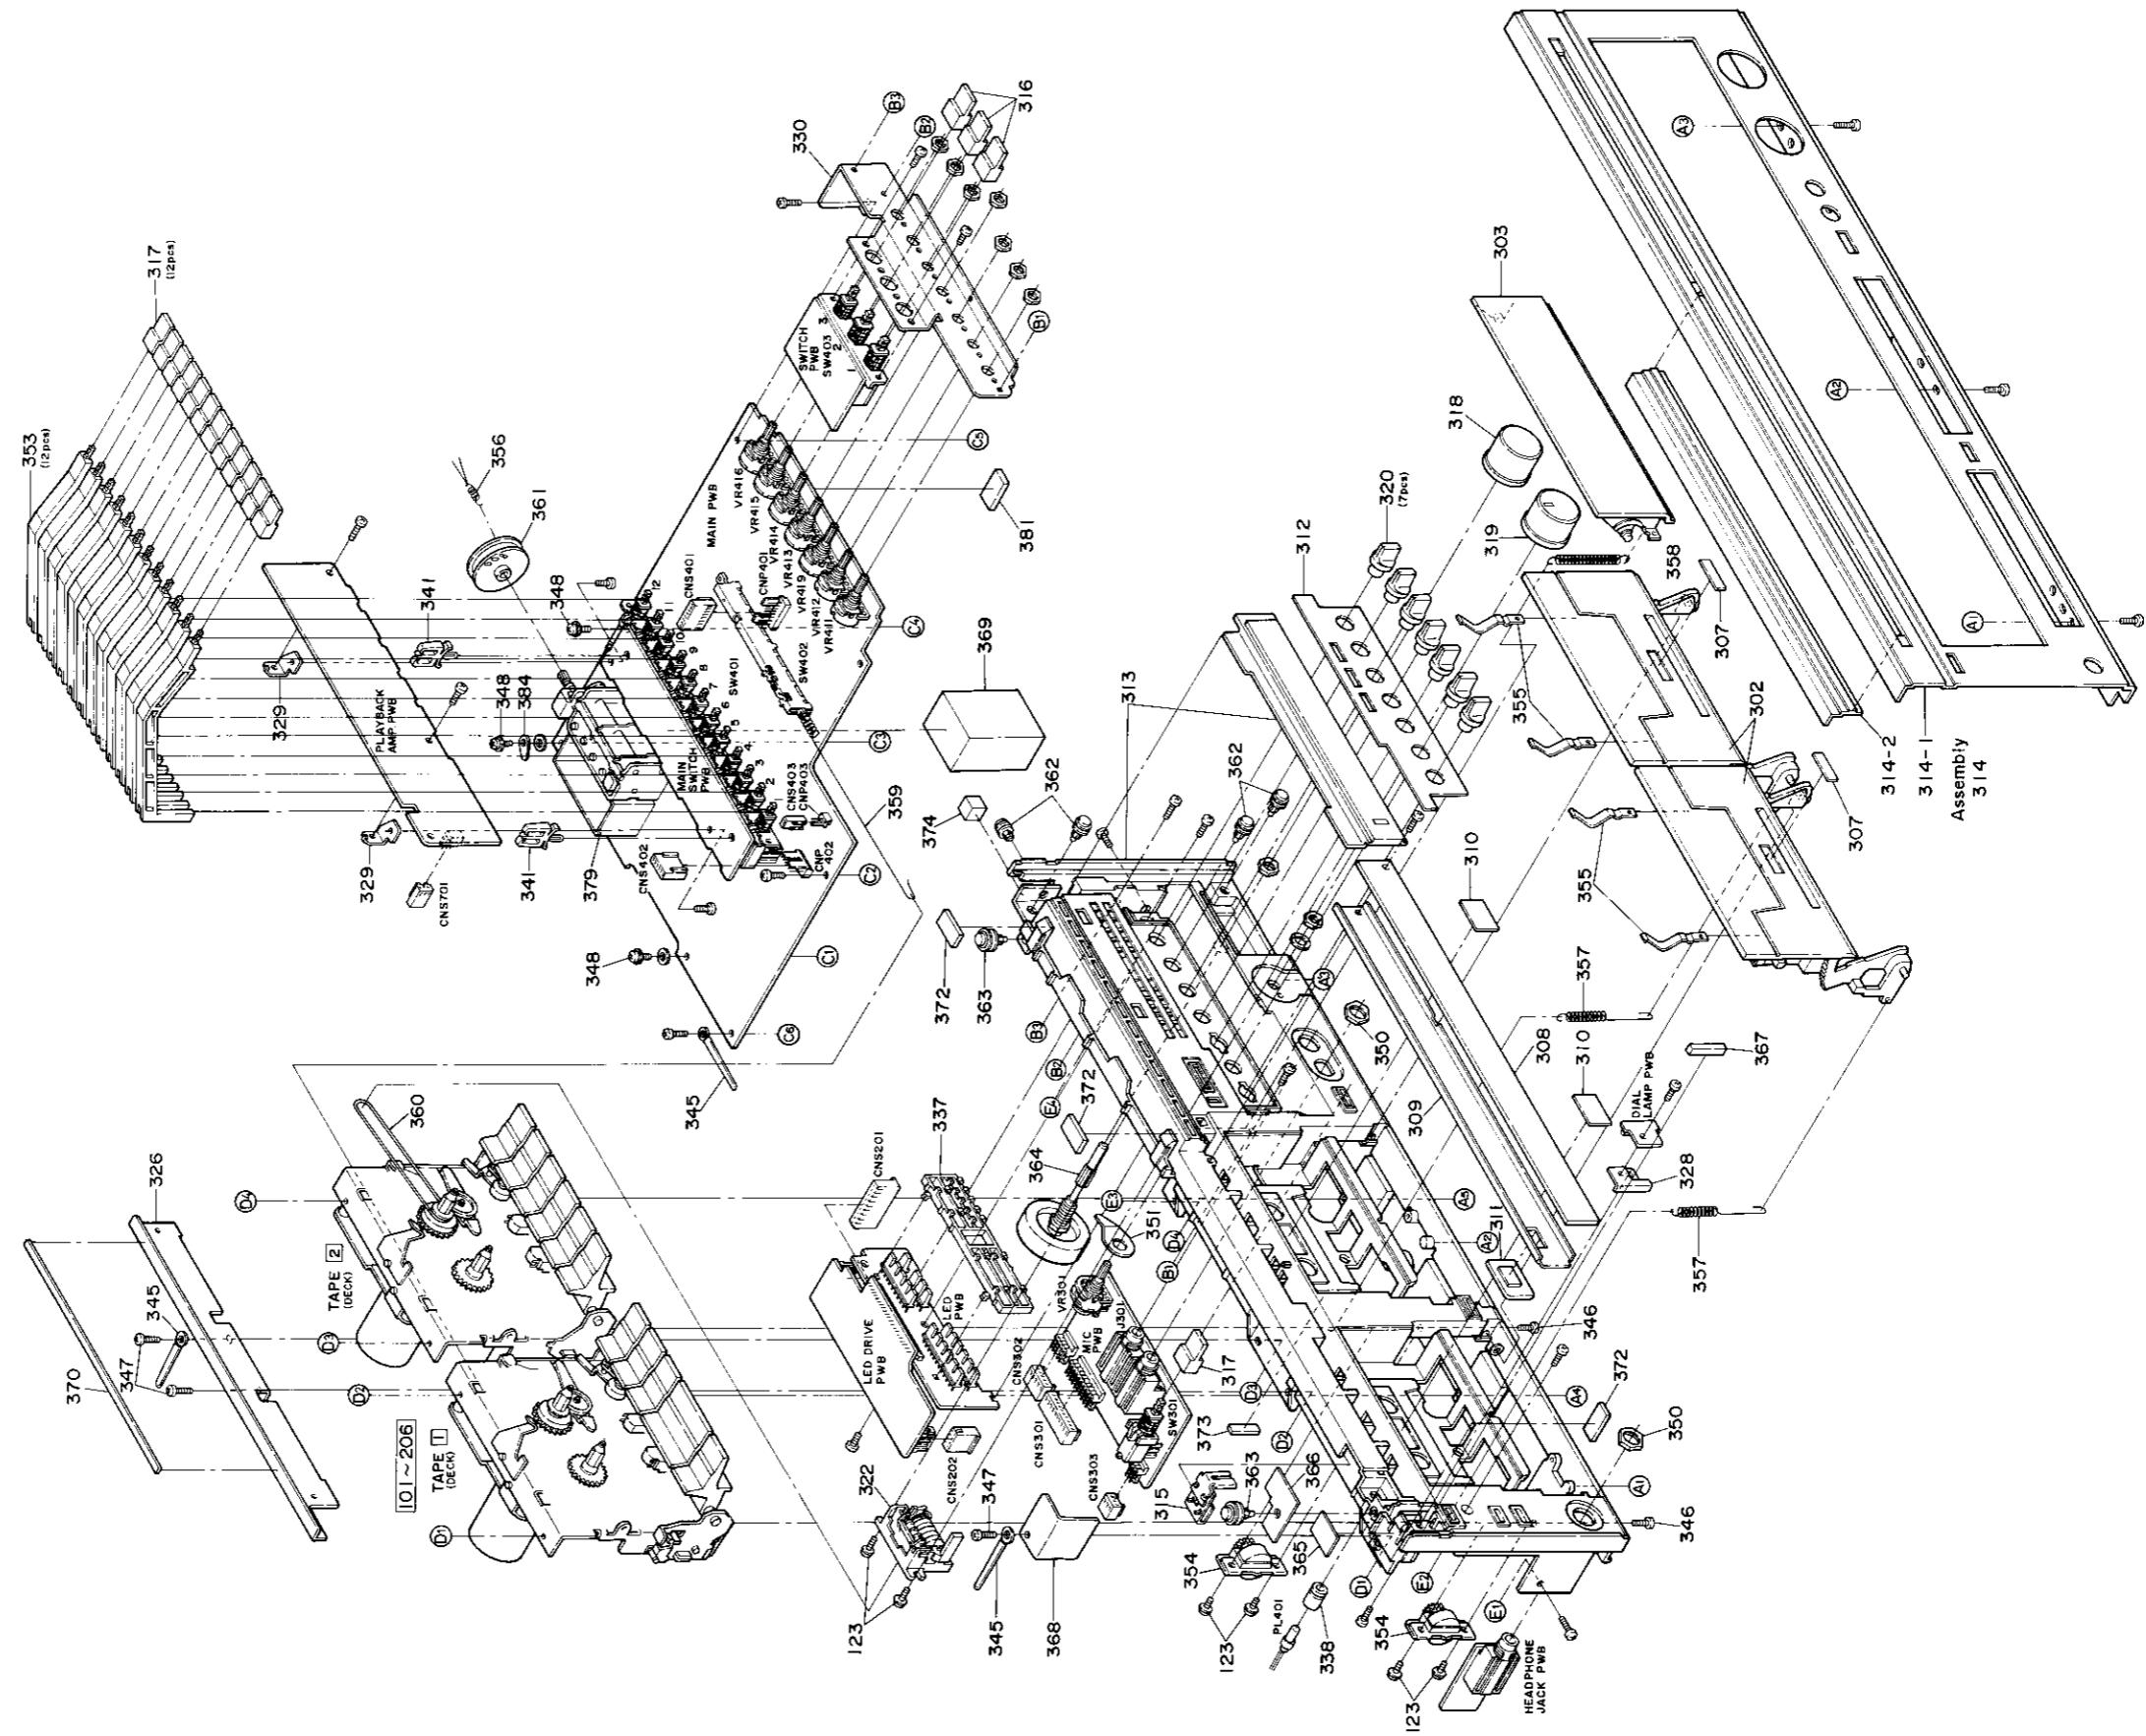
CABINET EXPLODED VIEW (2/2)
